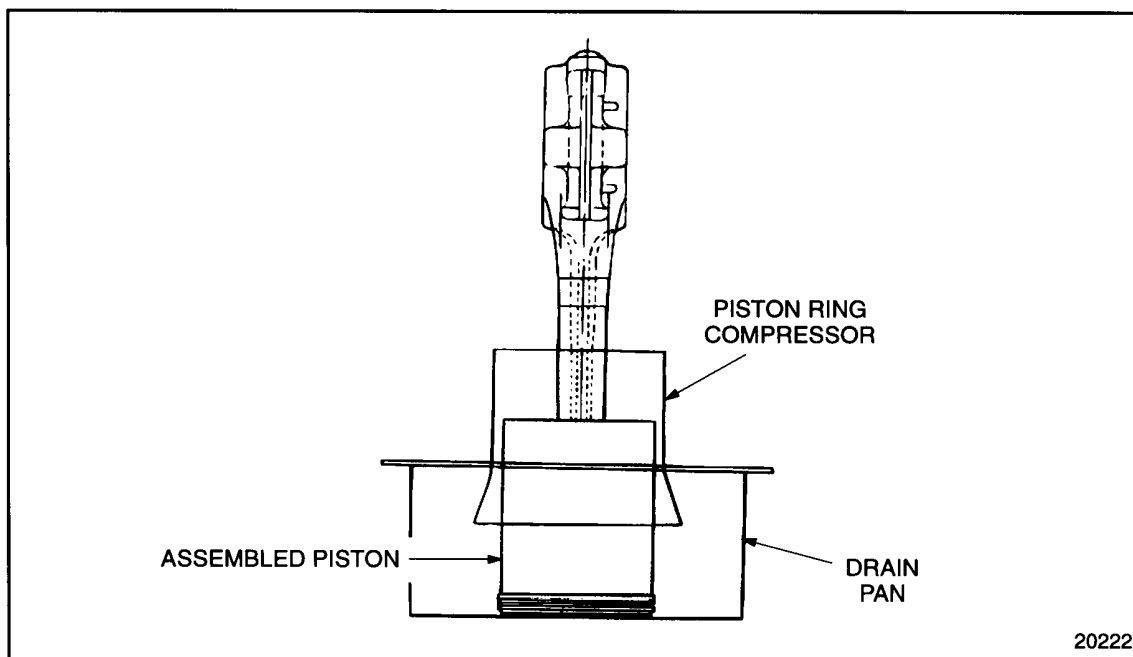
Installing Piston and Connecting Rod Assembly into Ring Compressor
